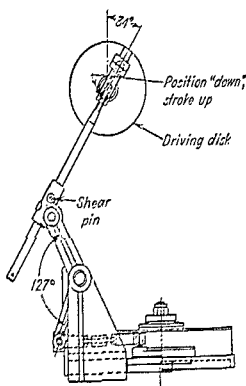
Underdrive dial feed. (F. J. Littel Machine Co.)
